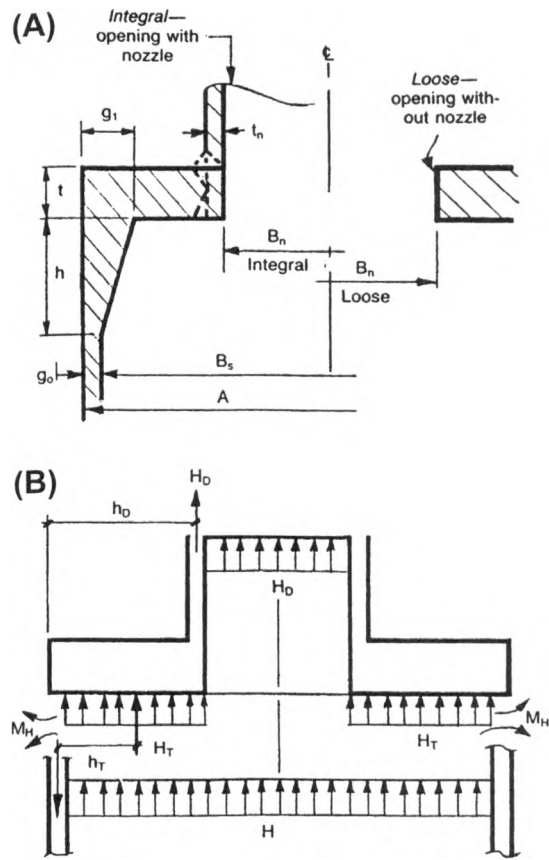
Dimensions (A) and loading diagram (B) for a flat integral head with opening.
